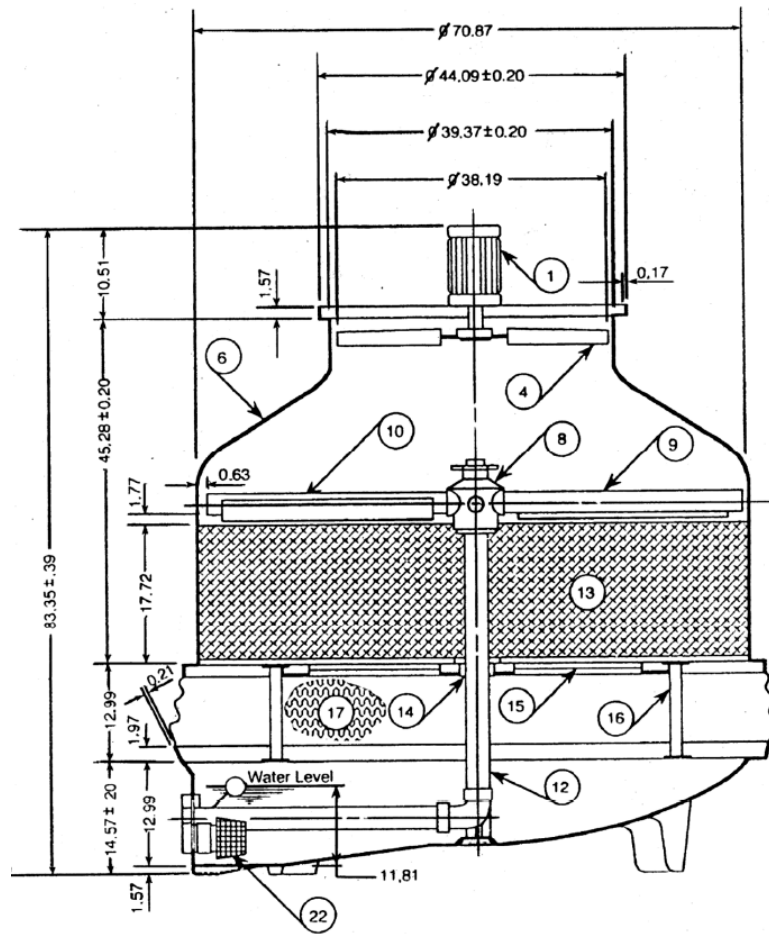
Detailed technical drawing along with dimensional parameters [24].
